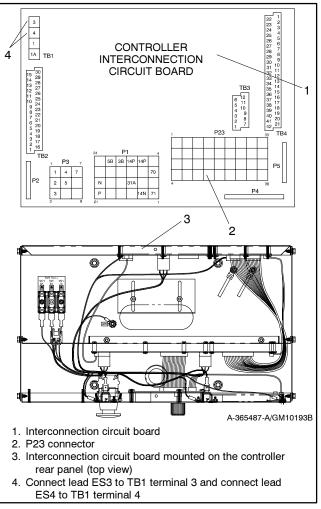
Attaching Wiring Connection Harness to the Interconnection Circuit Board
